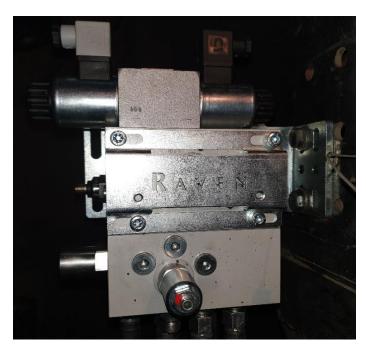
THE HYDRAULIC DRIVE UNIT BRACKET MOUNTED TO THE MANIFOLD
